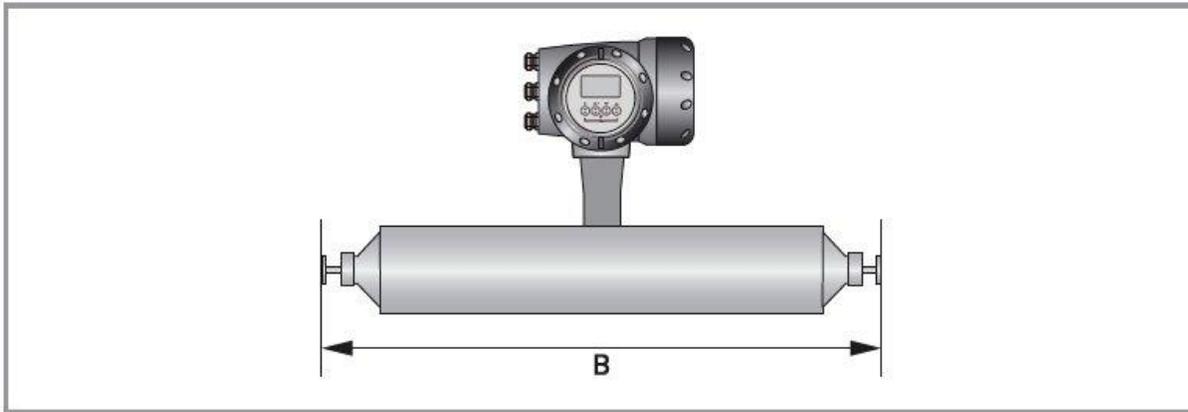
Hygienic Connections: All Welded Versions
